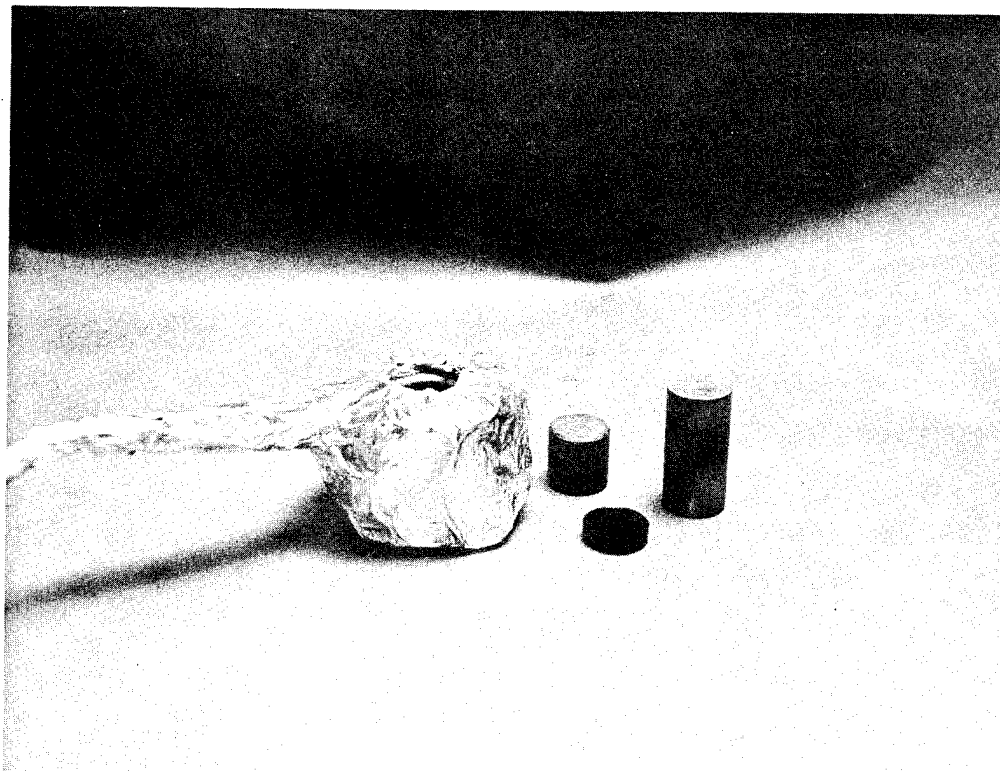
Assembled Mold and Heater Employed for Polyimide Fabrication
